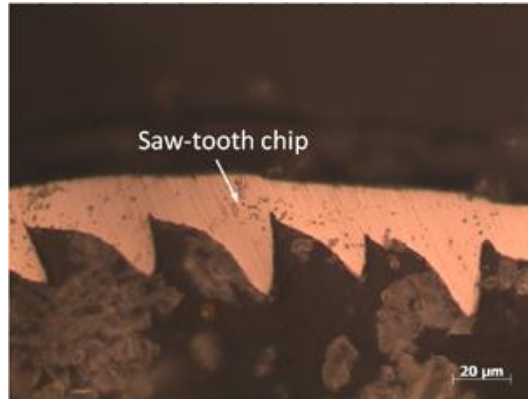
Image of the saw-tooth chip obtained from hard machining of AISI O2 steel
